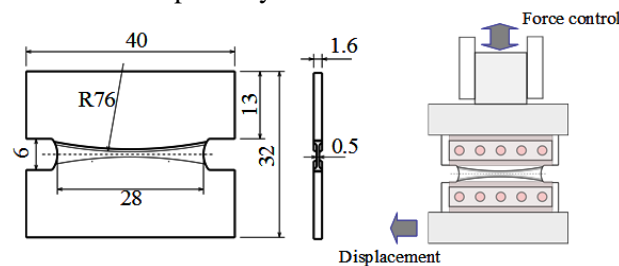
Butterfly specimen and setup for shear fracture test [5].
